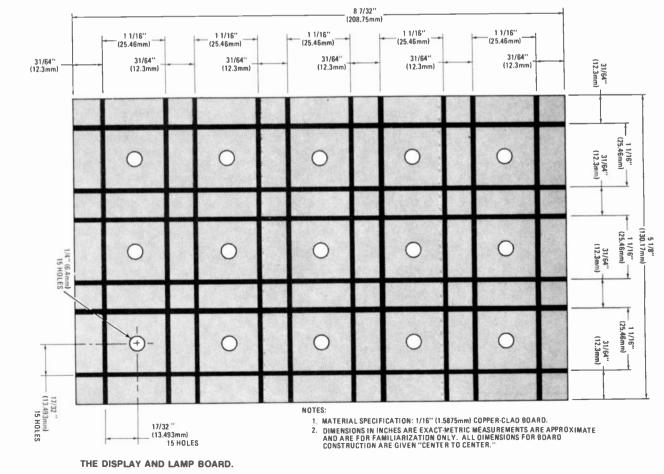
PRINTED CIRCUIT LAYOUT for the Electronic Slot Machine, shown half size.
